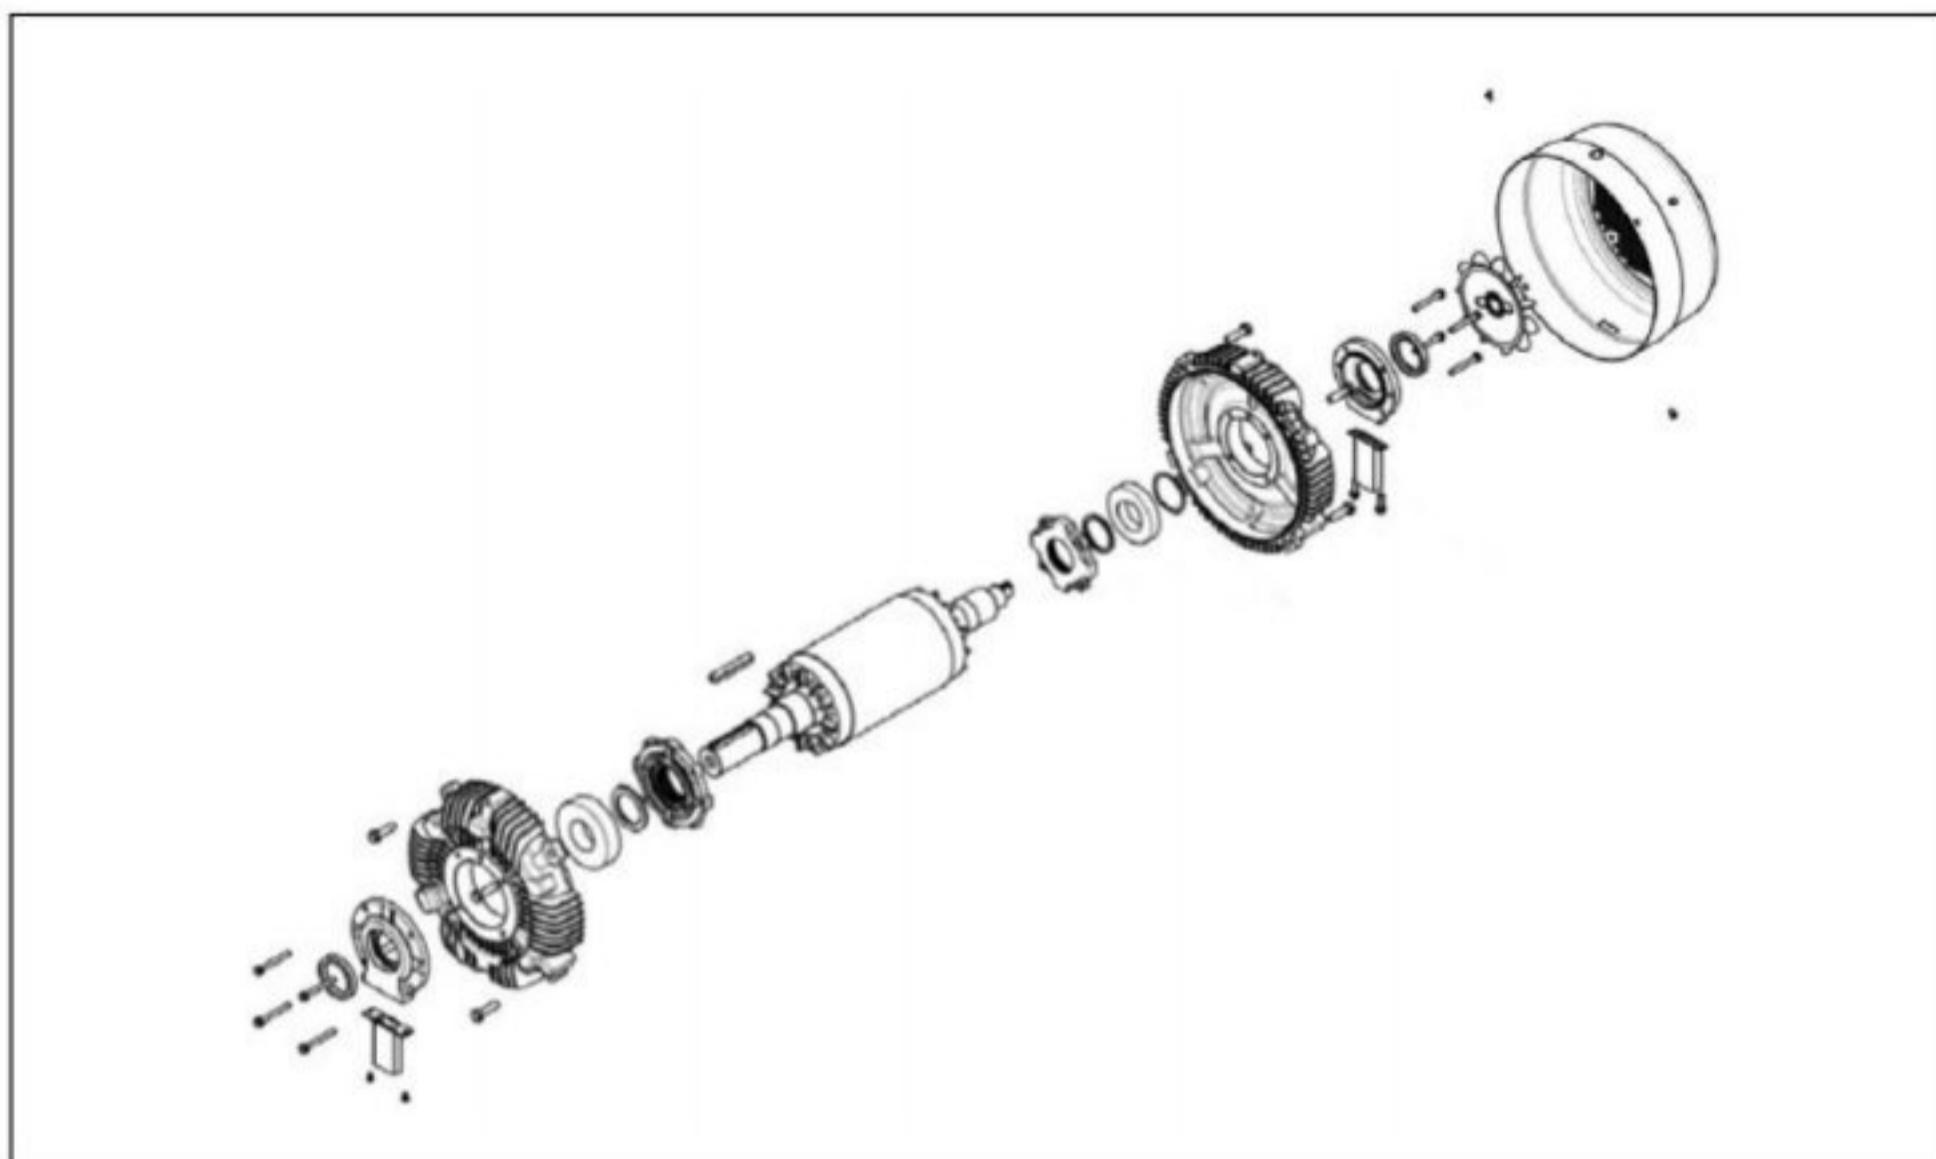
Rotor assembly (active part, shaft, bearings, end shields, fan)
